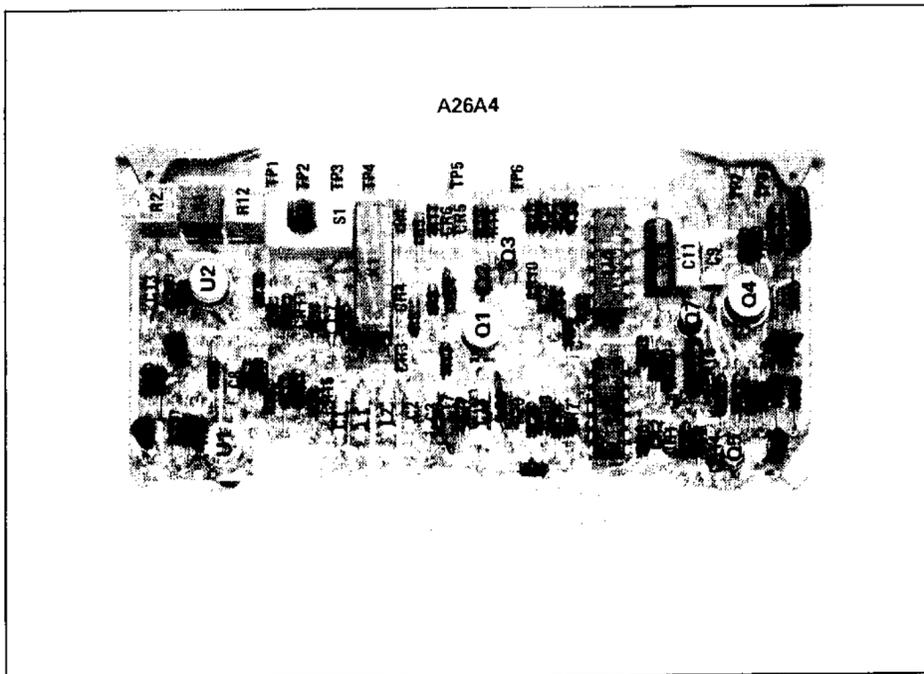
A26A4 AGC Amplifier Assembly Component Locations
